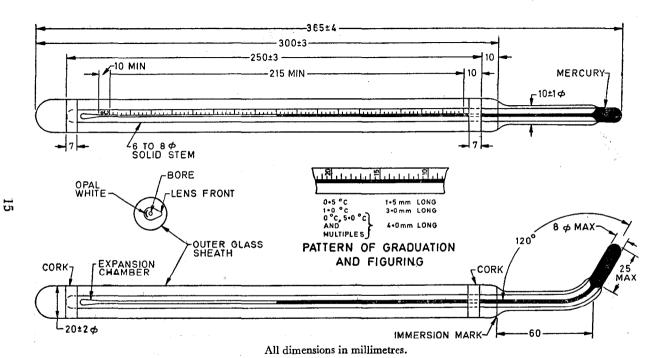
Soil Thermometer, Sheathed, Solid-Stem, 120° Bent, for 5 cm Depth, Range -20 to +65°C
